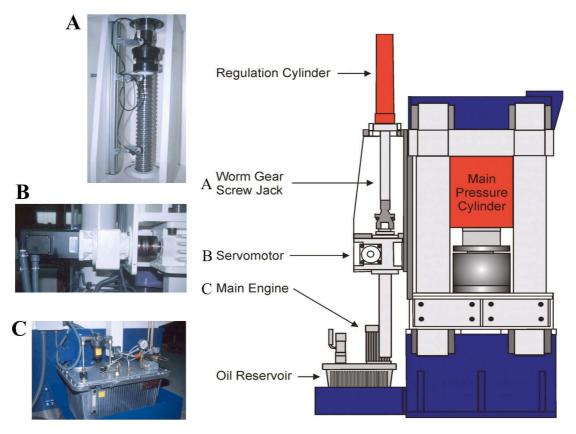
Schematic side view of the press with the hydraulic unit. A: Worm gear screw jack; B: Servomotor for slow pressure changes; C: Main hydraulic unit and oil reservoir. [84]
